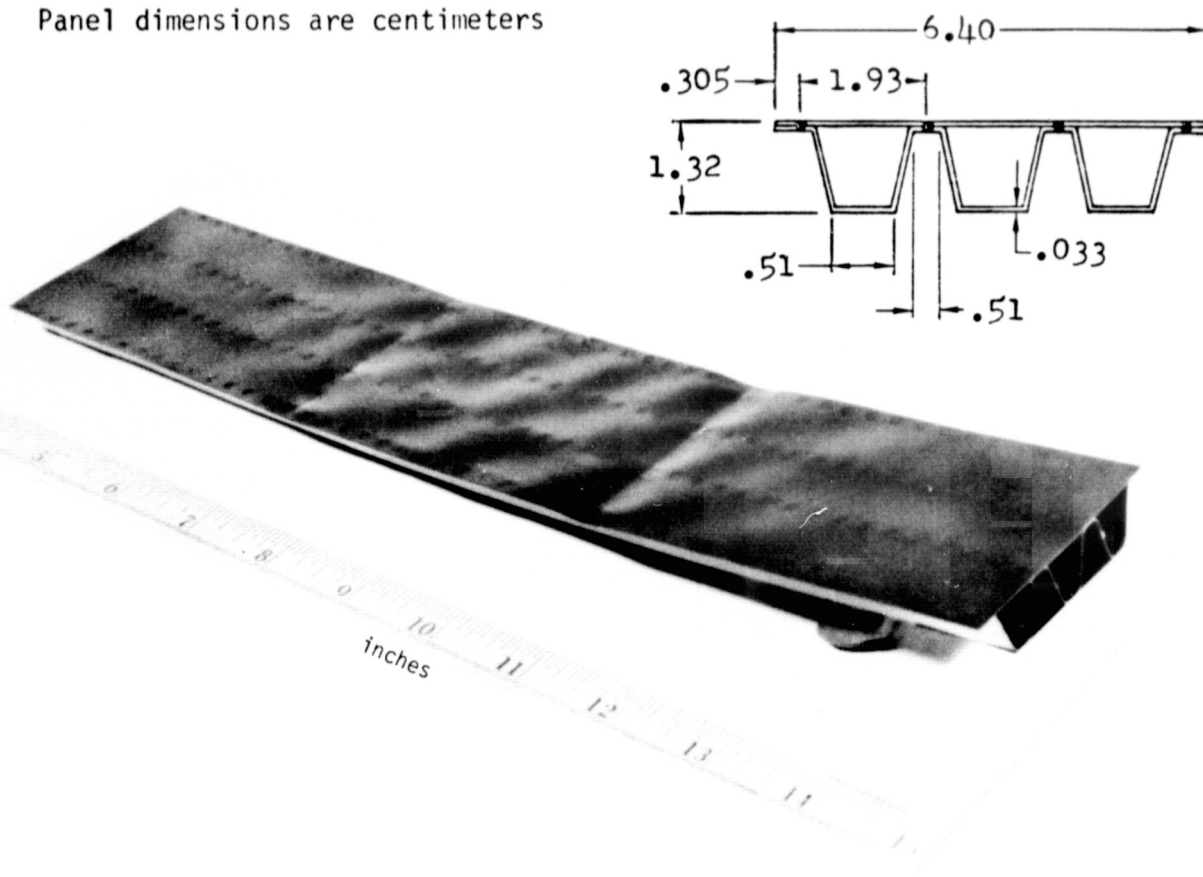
SUBSIZE PANEL T1 CROSS SECTION AND PHOTOGRAPH AFTER TEST
